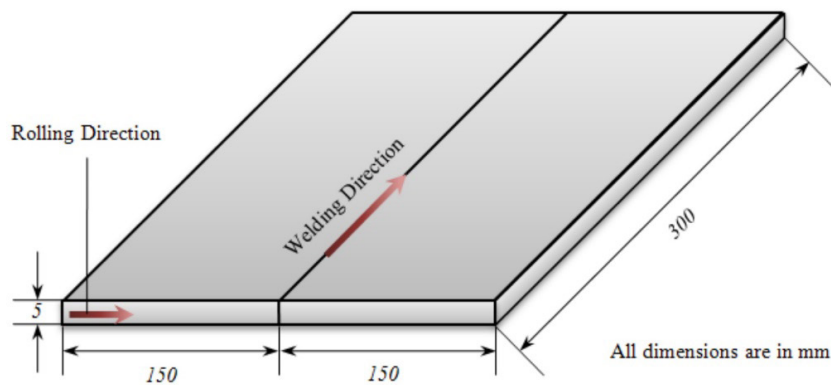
Dimensional details of sheets, sheets rolling and welding process directions.
